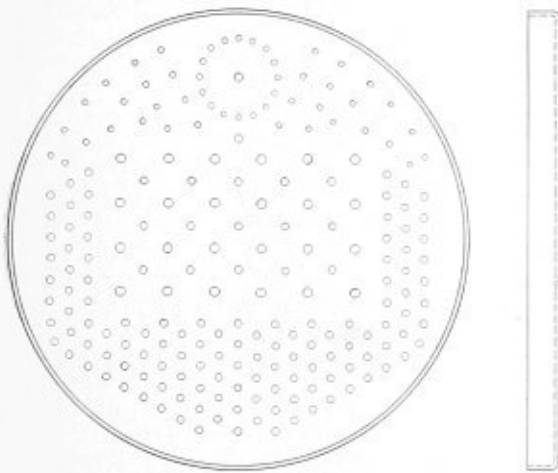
Flanged front tube sheet. Lead holes for drilling and reaming the tube holes and dry-pipe opening are shown
